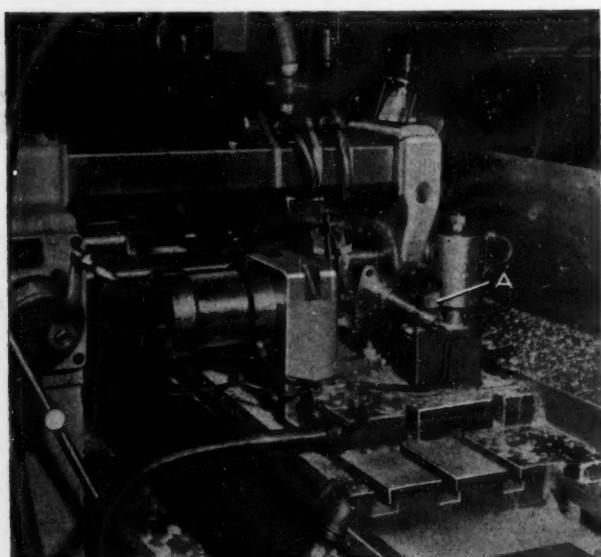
At this Set-up on a Sundstrand Machine, the Fork-gap in Each Stub-axle is Milled in 1.17 min.
